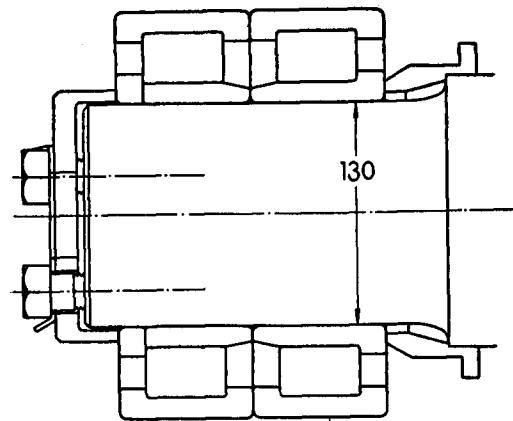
Axle bearing arrangement incorporating cylindrical roller bearings. U.I.C. 130 mm journal. Bearing dimensions: $120 \times 240 \times 80$ mm.
